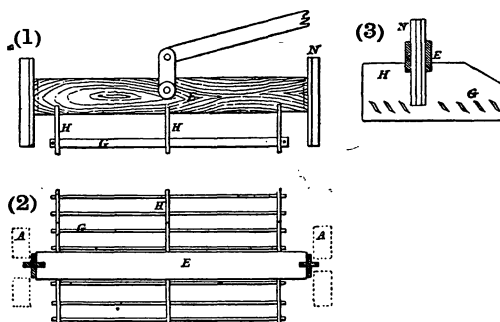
DETAILS OF THE BLOCK OF A JACQUARD MACHINE.
